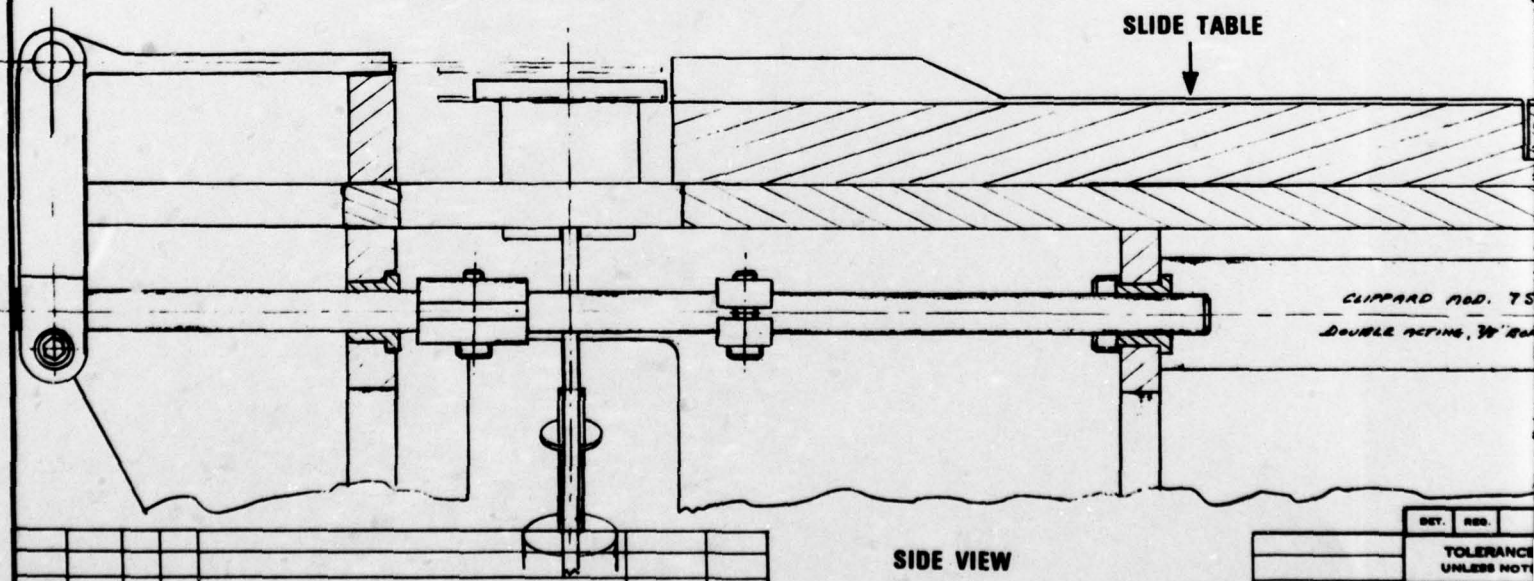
ASSEMBLY DRAWING OF AIR SUBSTRATE HANDLING SYSTEM
